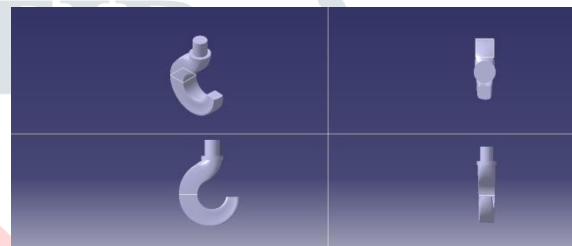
Modeling of EOT crane hook in Rectangular cross section
